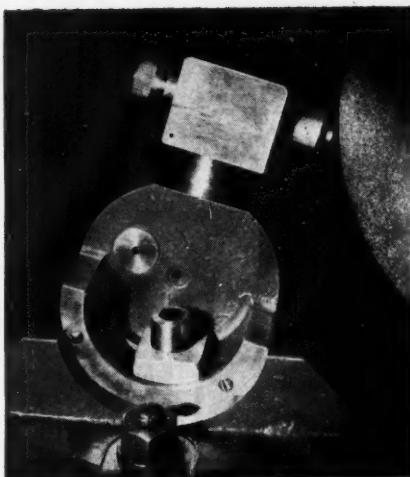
Close-up view of special diamond dressing tool holder used in making tests on diamonds.
